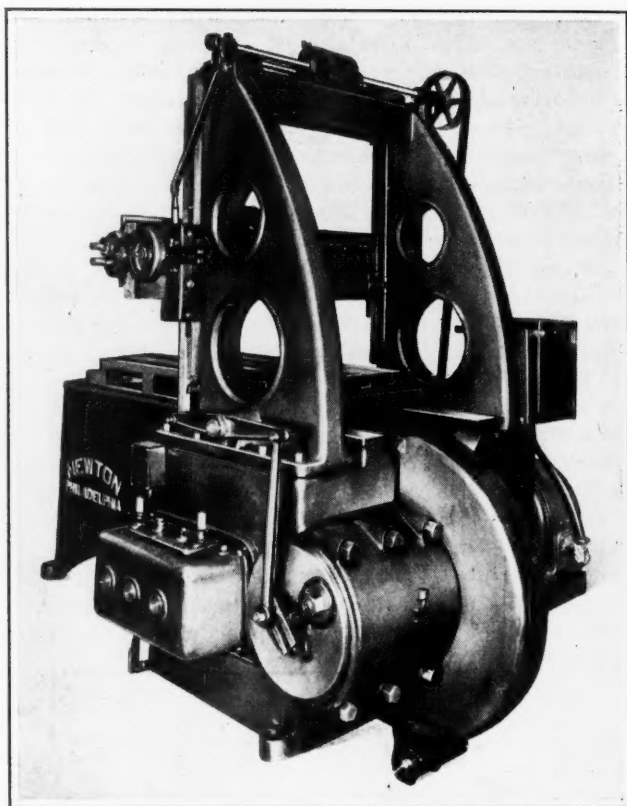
View of Newton Crank Planer showing the Compact Design of the Units on the Operating Side
